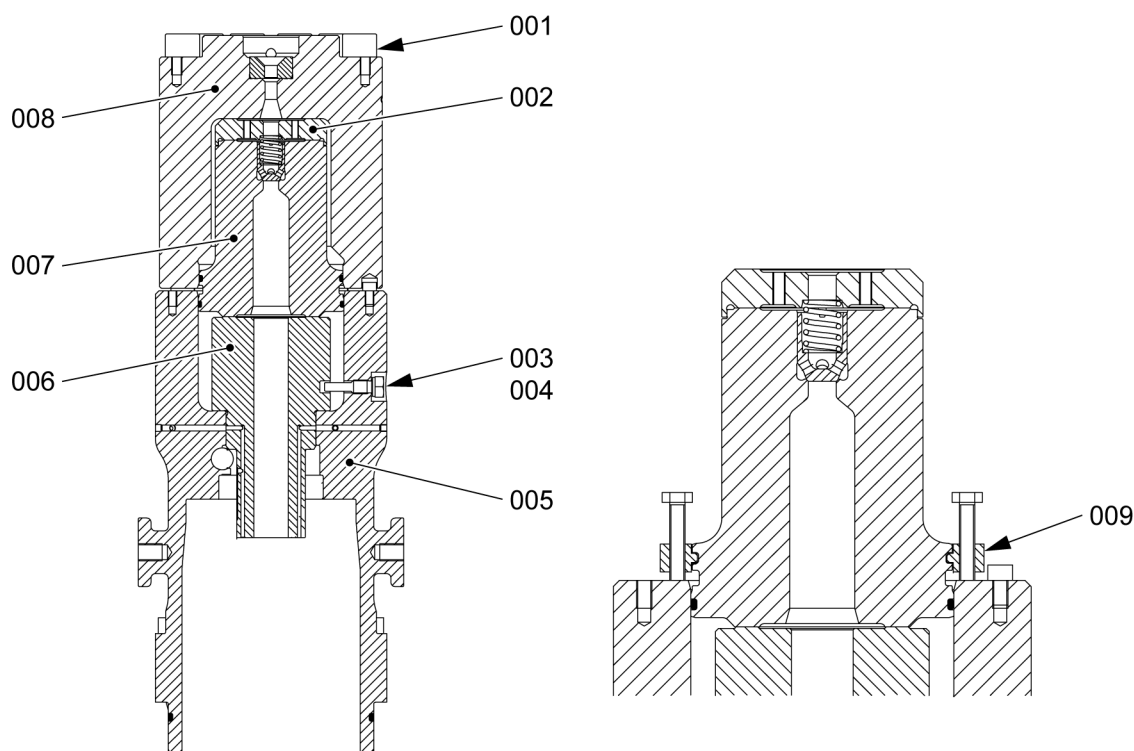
Fuel pump (X4) - Guide piston removal
